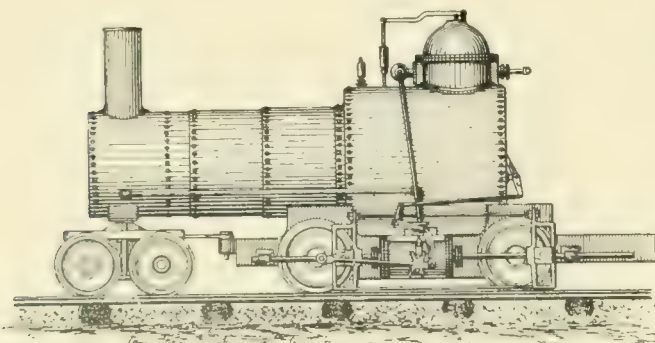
PITTSBURGH SLOTTED CROSSHEAD LOCOMOTIVE.
